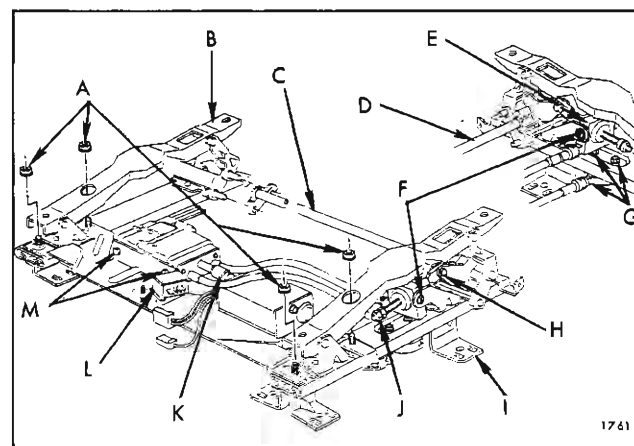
H24—Four-Way (Tilt) Seat Adjuster Assembly
